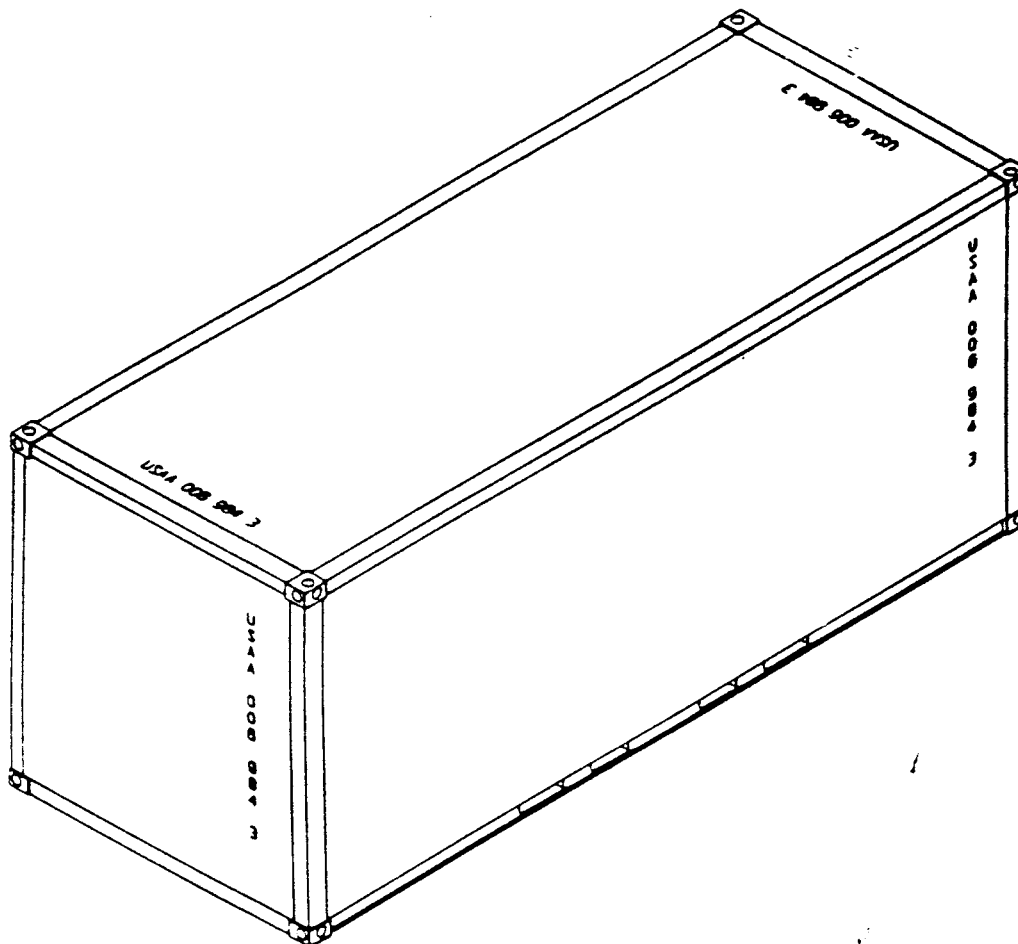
Typical Vertical Layout of ISO Identification Markings
